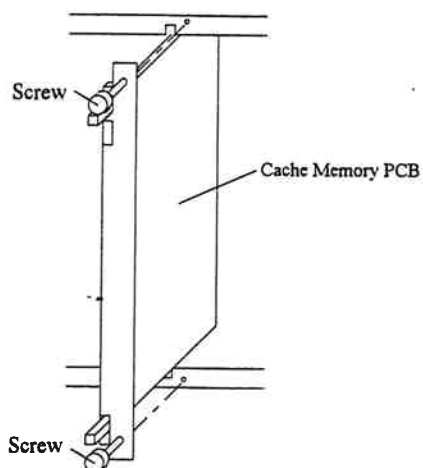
Removal of the Cache Memory PCB
